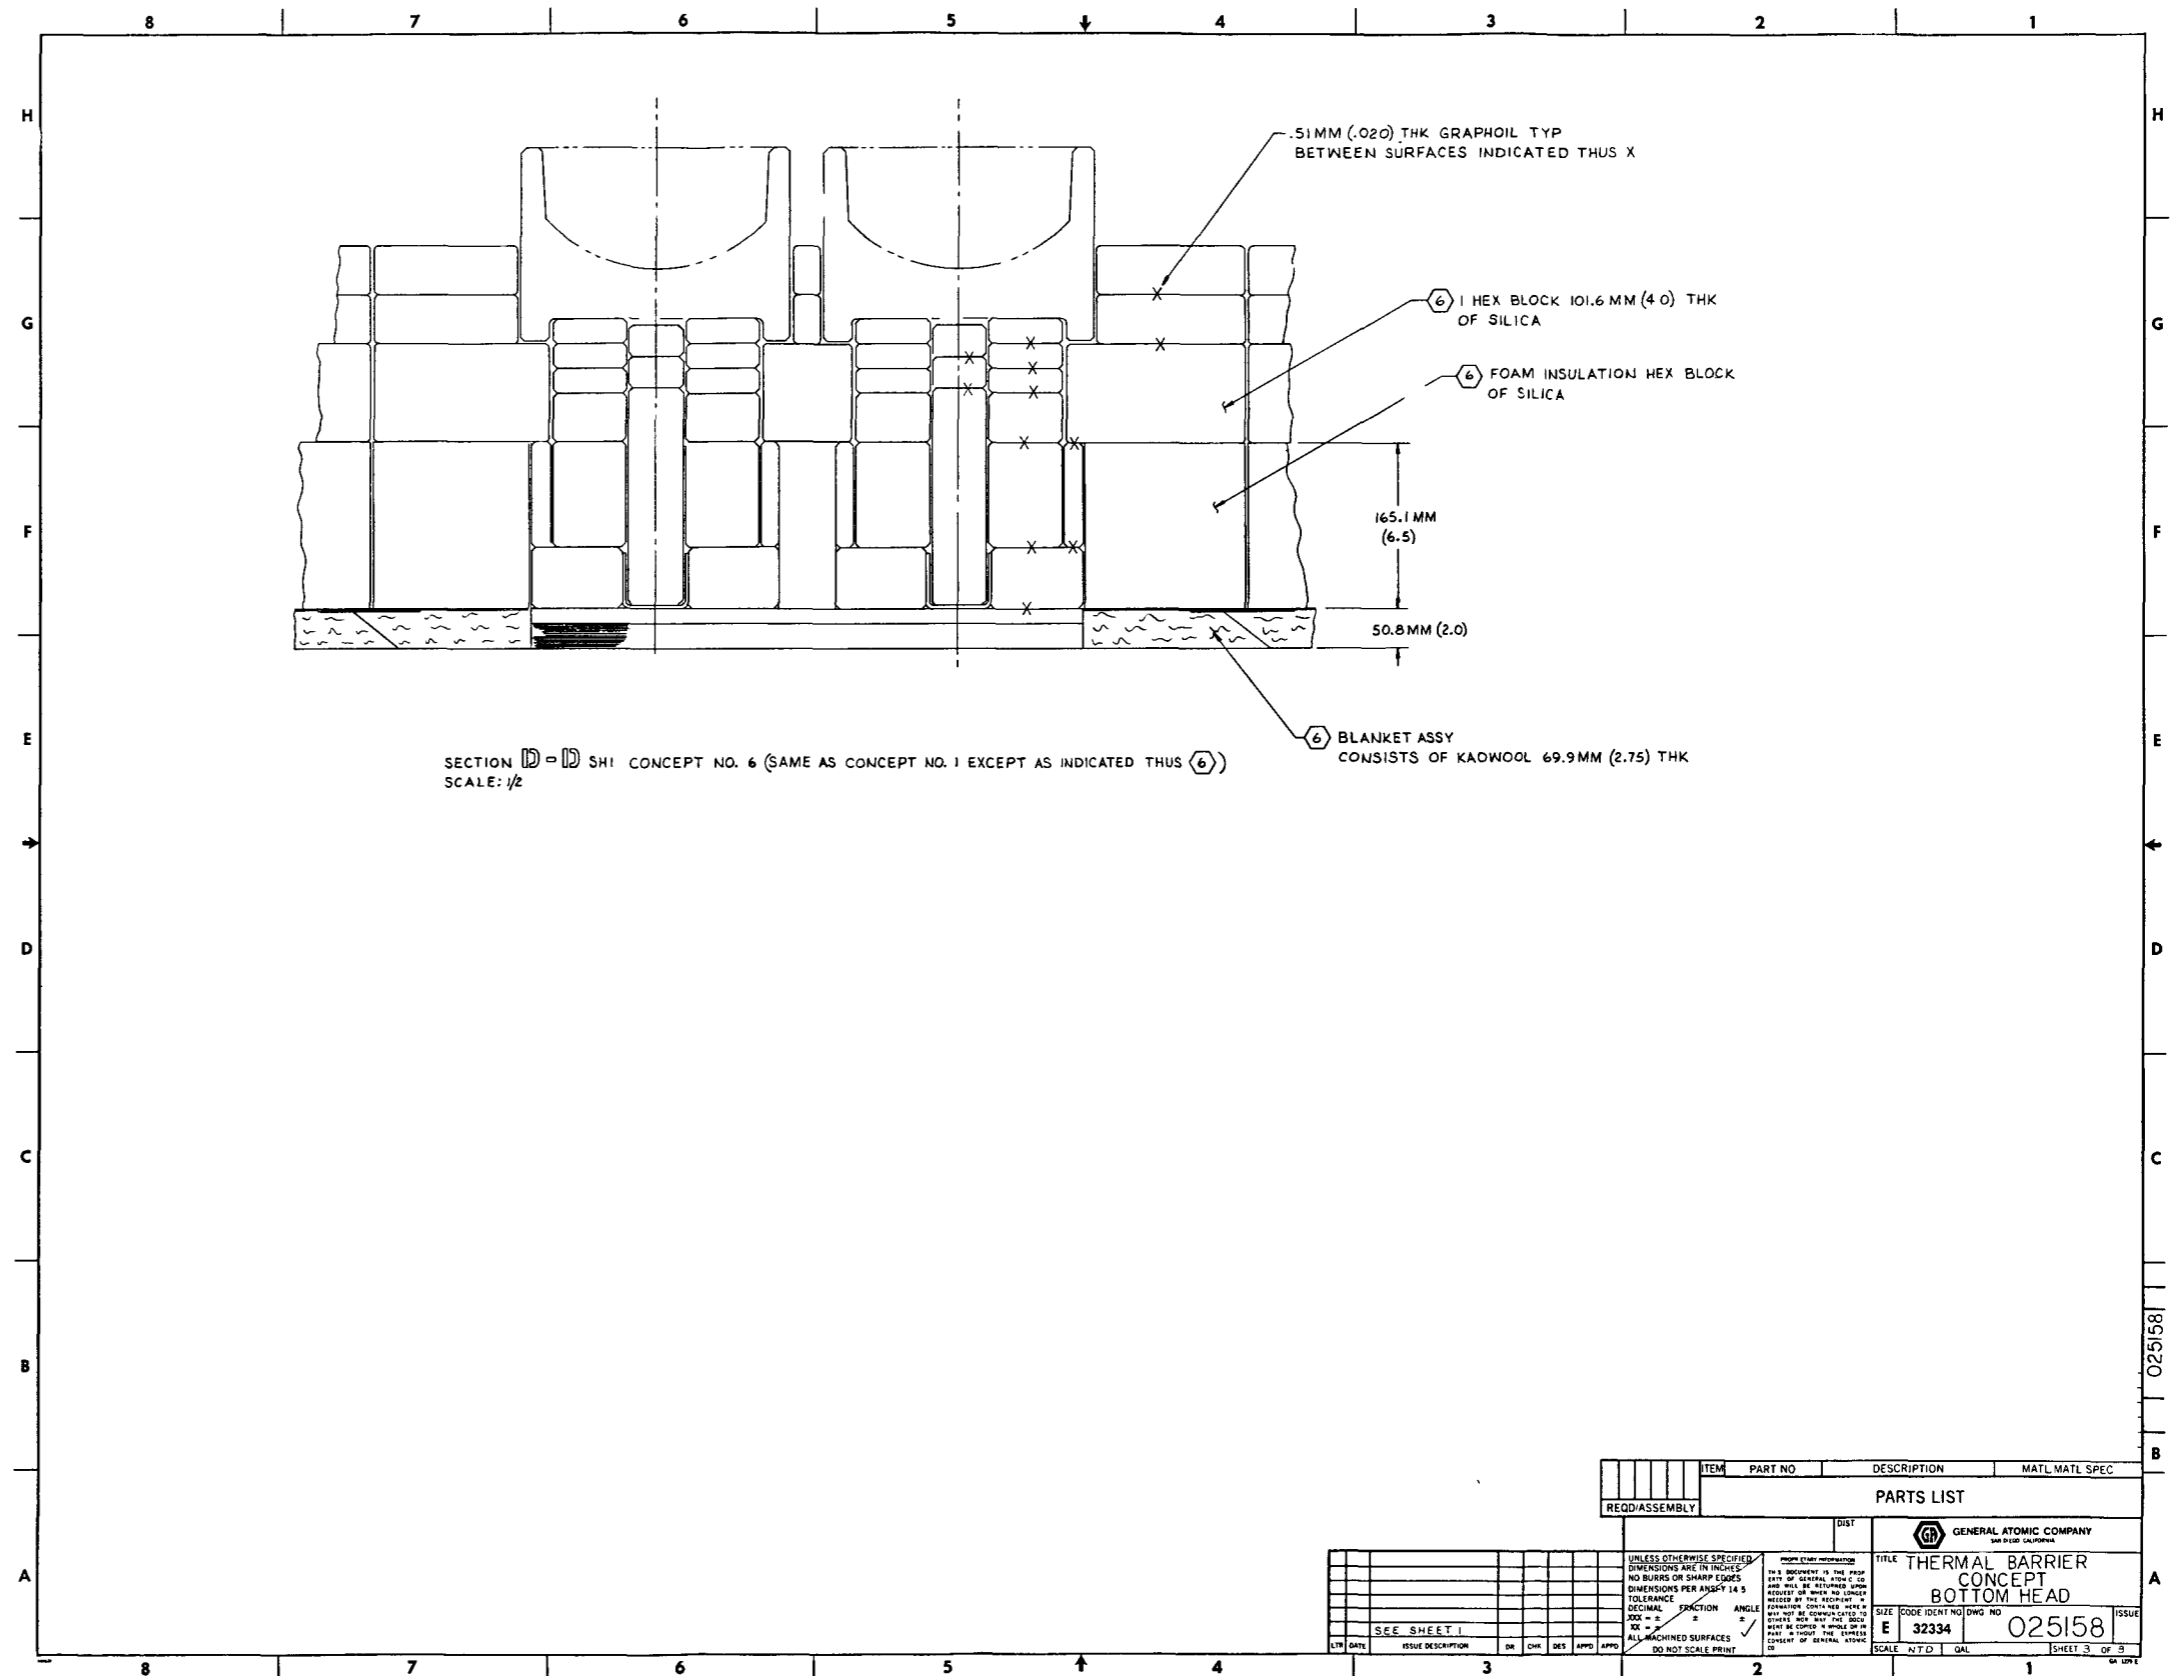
Thermal barrier bottom head (sheet 3 of 3)
